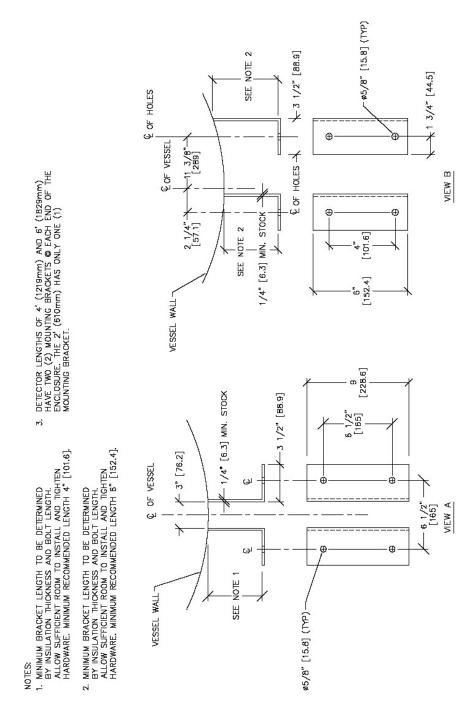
868570: LevelPRO installation / arrangement drawing -2 sources with 3 detectors (sheet 1 of 2)
